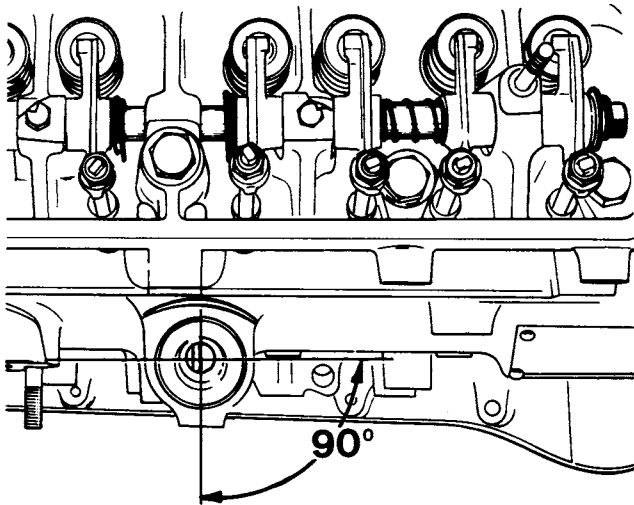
DISTRIBUTOR DRIVE SHAFT ALIGNMENT
